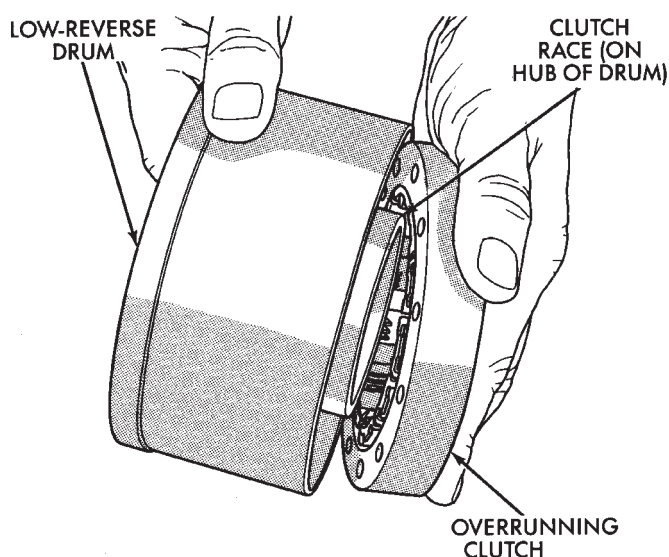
Temporary Assembly Of Clutch And Drum To Check Operation
